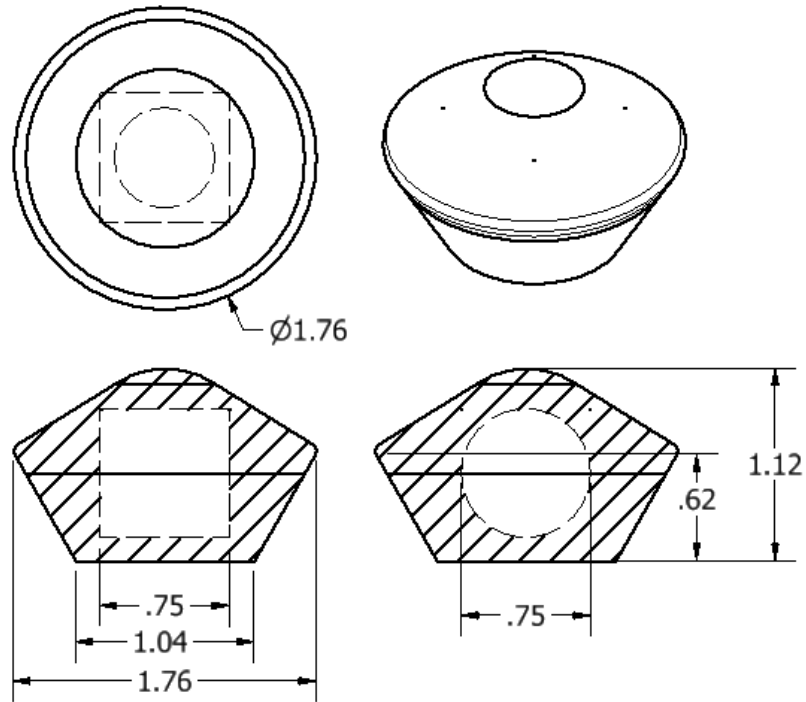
Stardust model with cavity for cylindrical $\frac{3}{4}$ inch magnet. Dimensions in inches.
